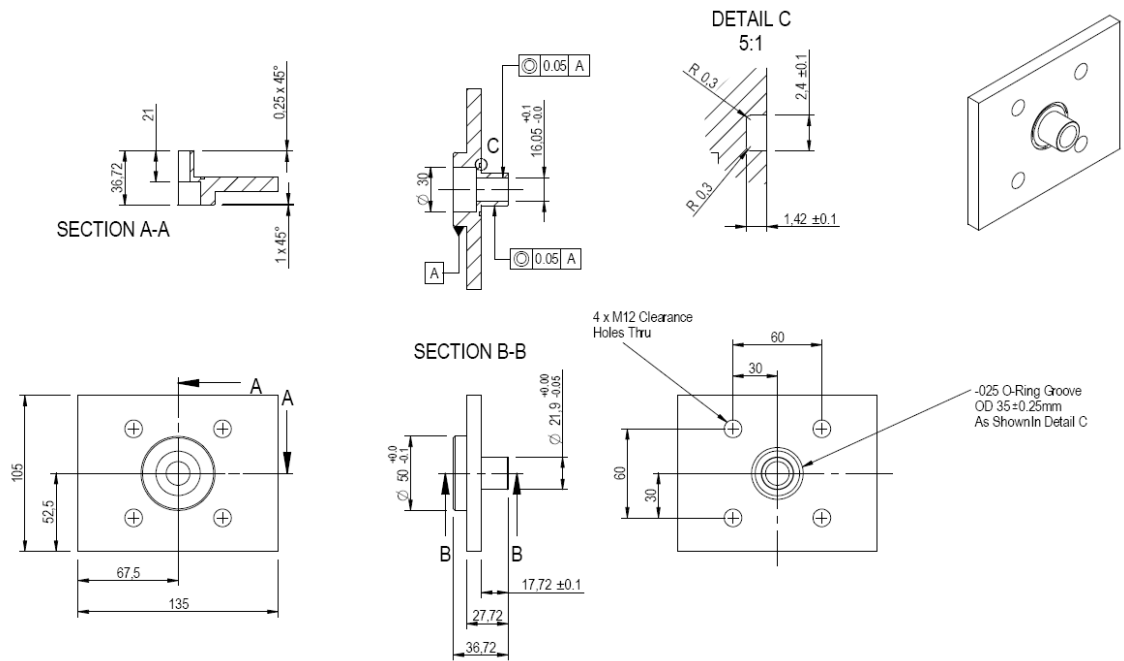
Internal housing block for active seal assembly with square o-ring sealing element
